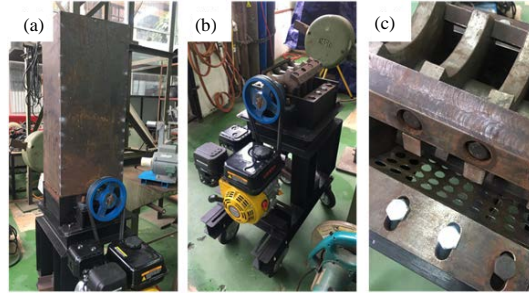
(a-c): (a) Developed hopper installed on top of the machine, (b) The gasoline engine, connected to the shaft via a pulley and (c) The fixed and rotary knives with a screen at the bottom
